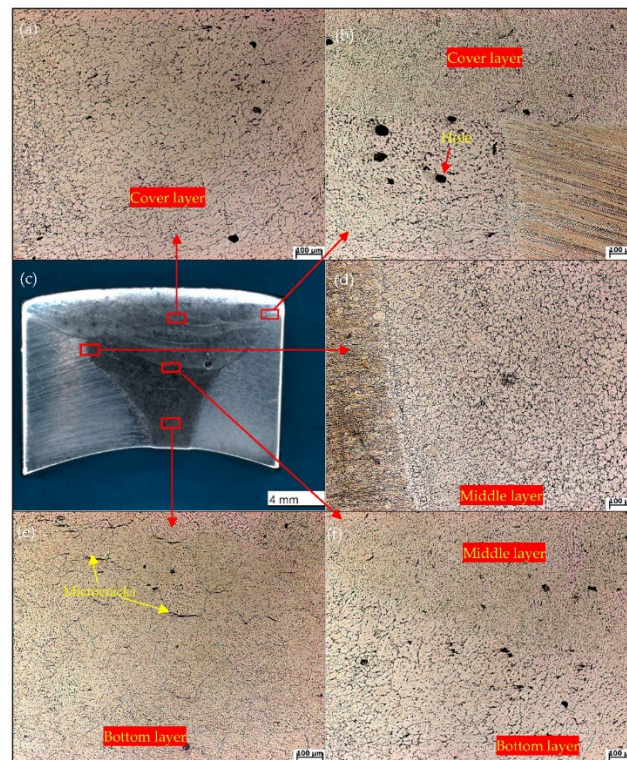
Face bending specimen metallography of the ER5087 welded joint, (a) the weld center of the cover layer, (b) the interface between the cover and middle layers, (c) the macromorphology of cross-section of the weld joint, (d) the FZ of the middle layer, (e) the weld center of the bottom layer, and (f) the interface between the middle bottom layers.
